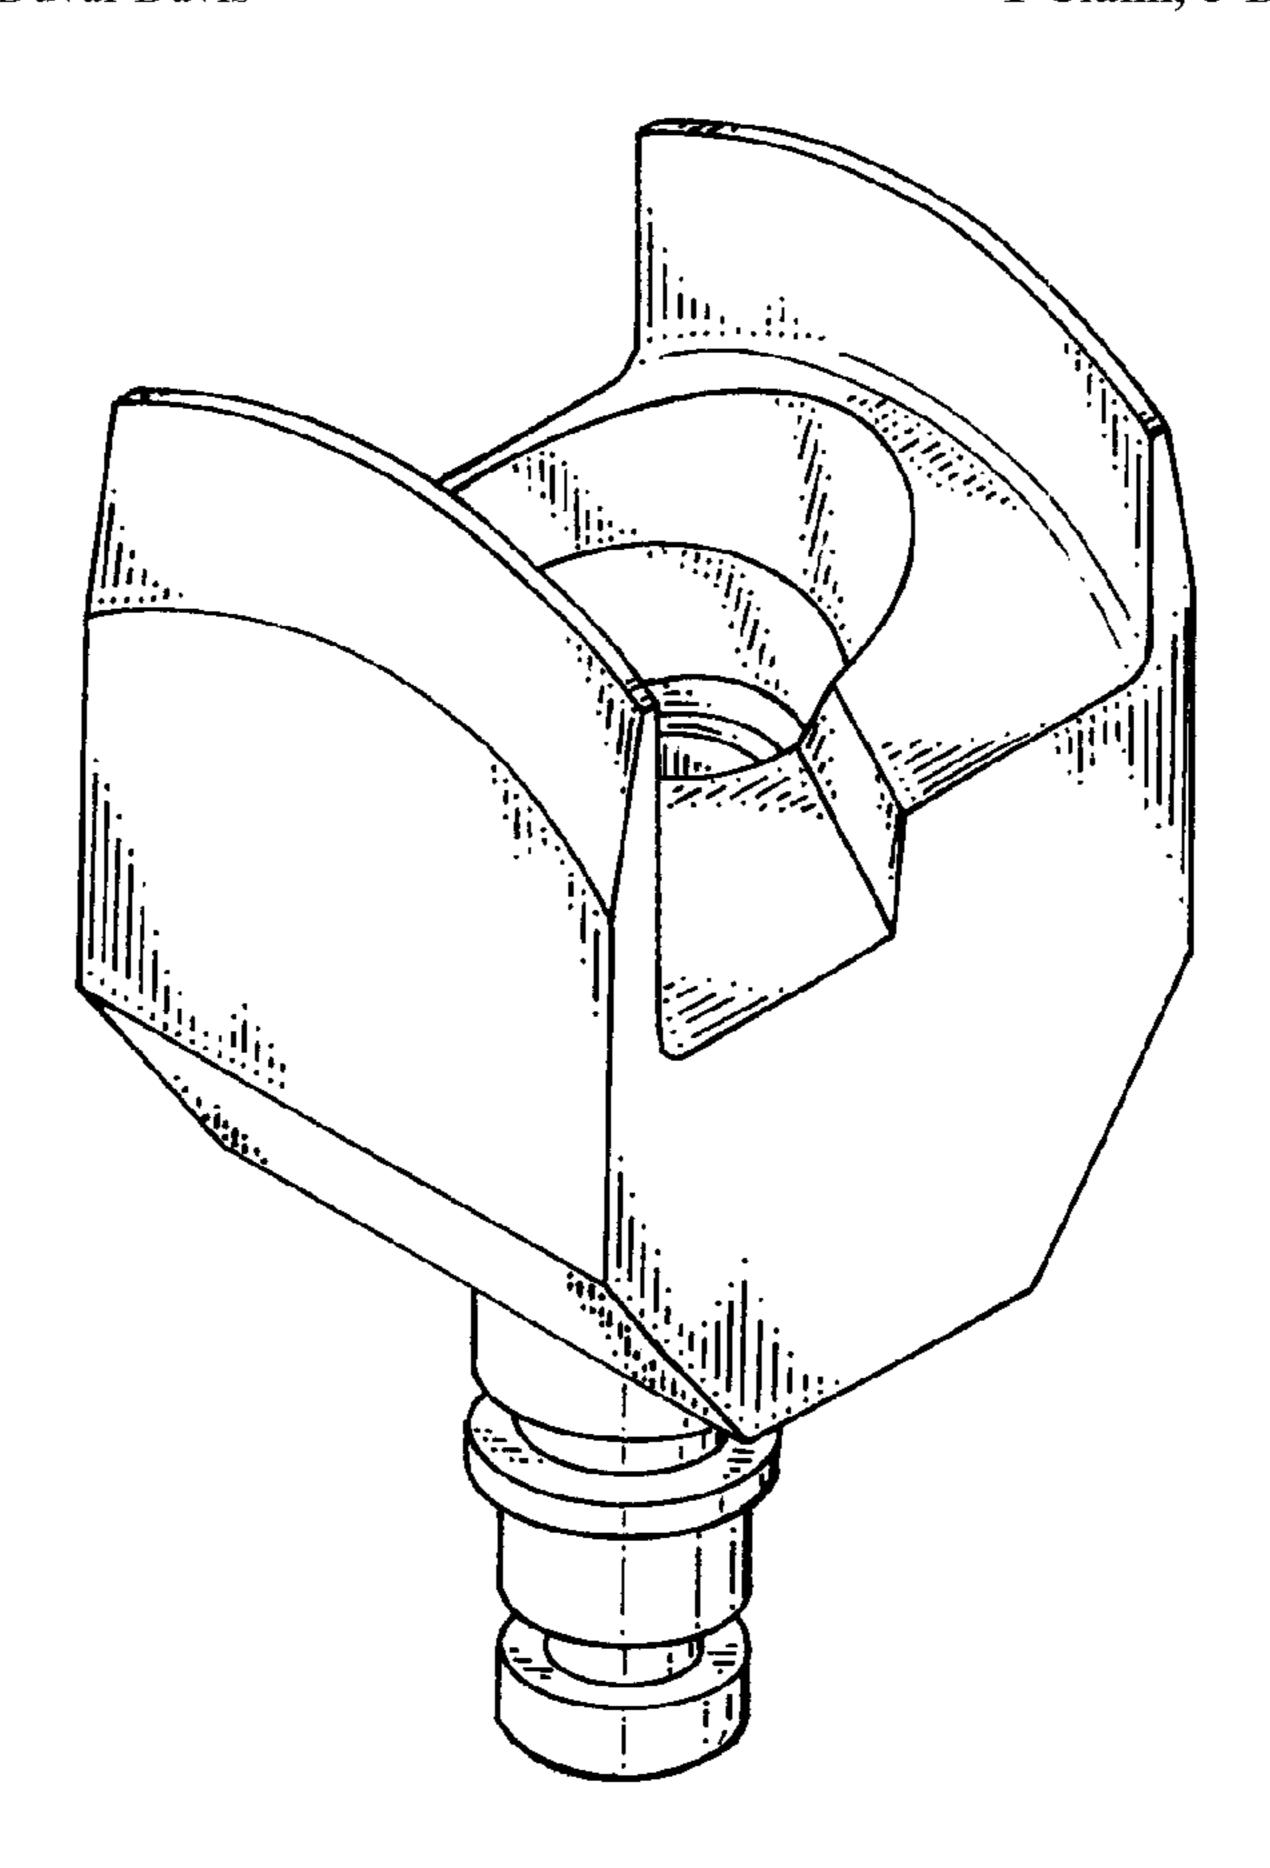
is a front perspective view of an alternate embodiment of a new design for an articulated adapter for dispensing liquid primers, coatings and sealants;
